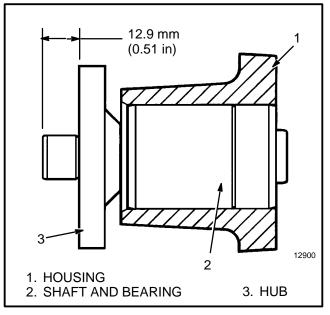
FAN DRIVE, 3.0L ENGINE
